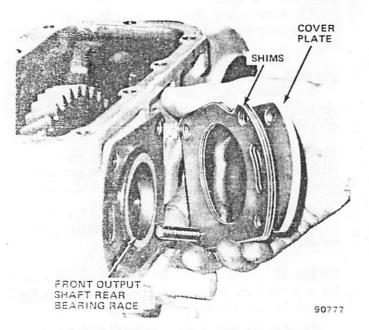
D-79 Cover Plate, Shims and Front Output Shaft Rear Bearing Race
